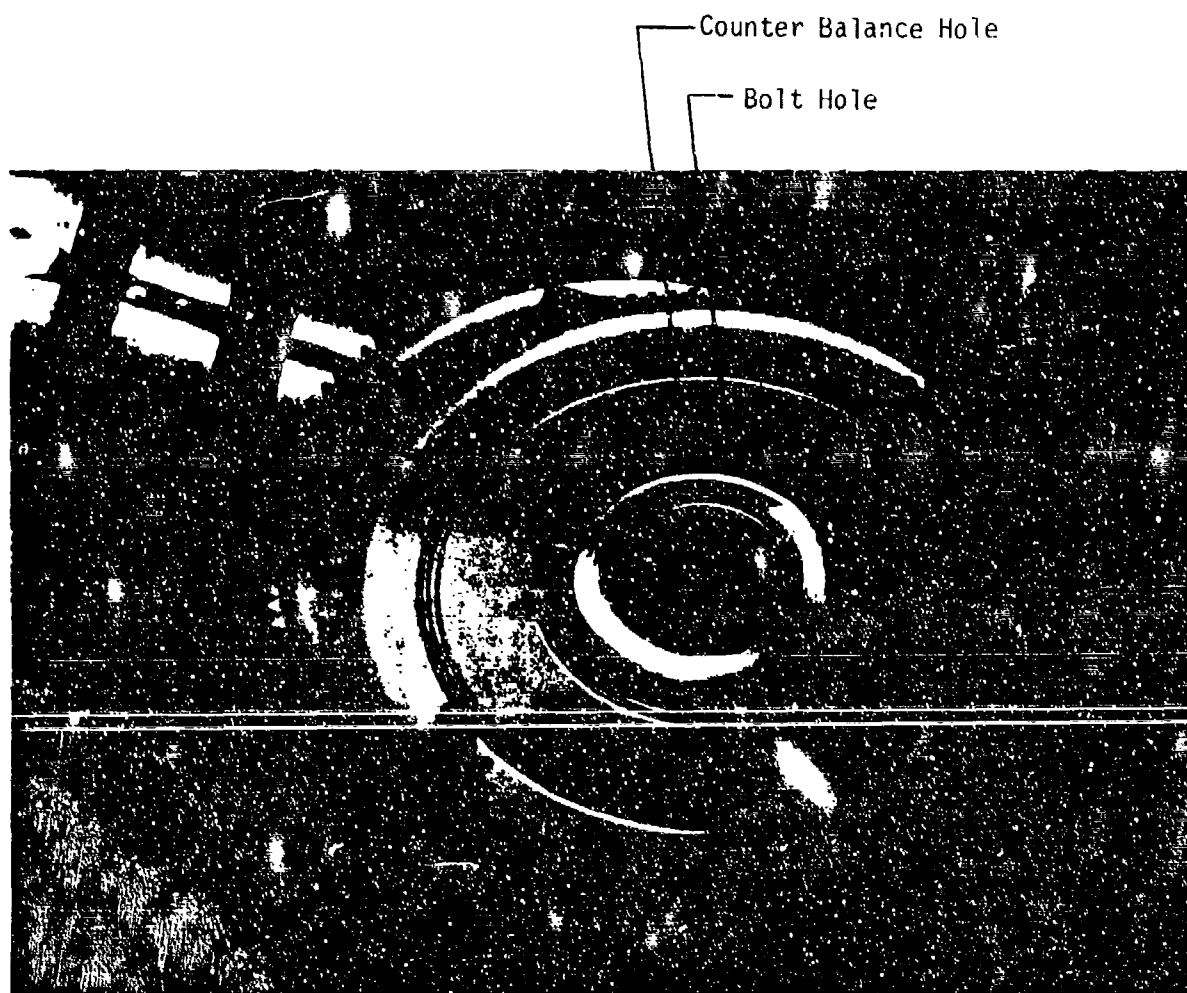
Front View of a Typical TF-33 Third Stage Turbine Disk Showing the Ten (10) Bolt Holes, Each of Which is Separated by a Counter Balance Hole.
